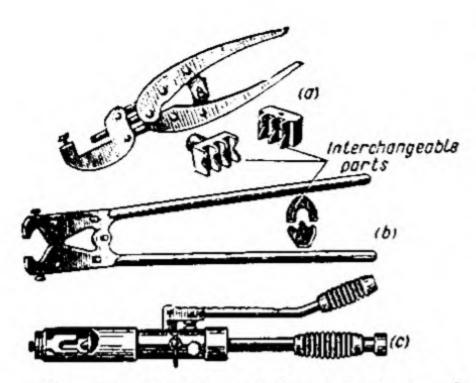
Tools used for jointing and terminating conductors by compression method:
